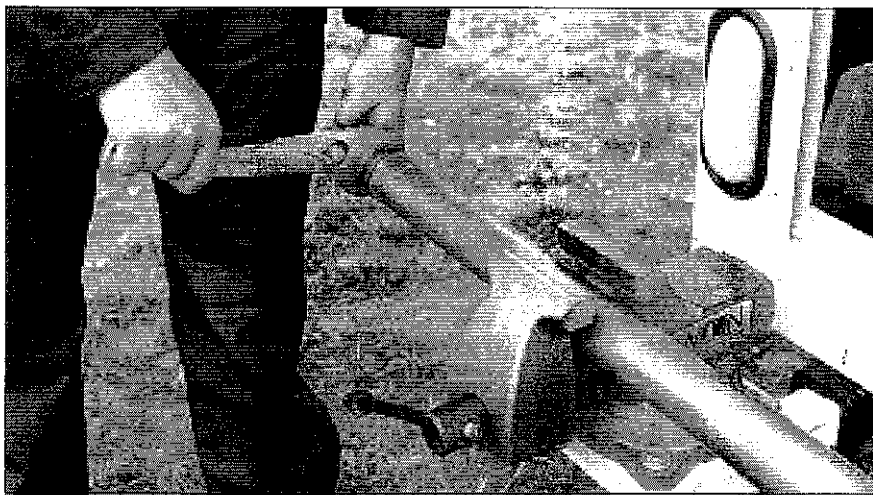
Tighten MC Drive Head with MC Combination Wrench. A vise is often used to hold the MC Sample Tube during this step.
